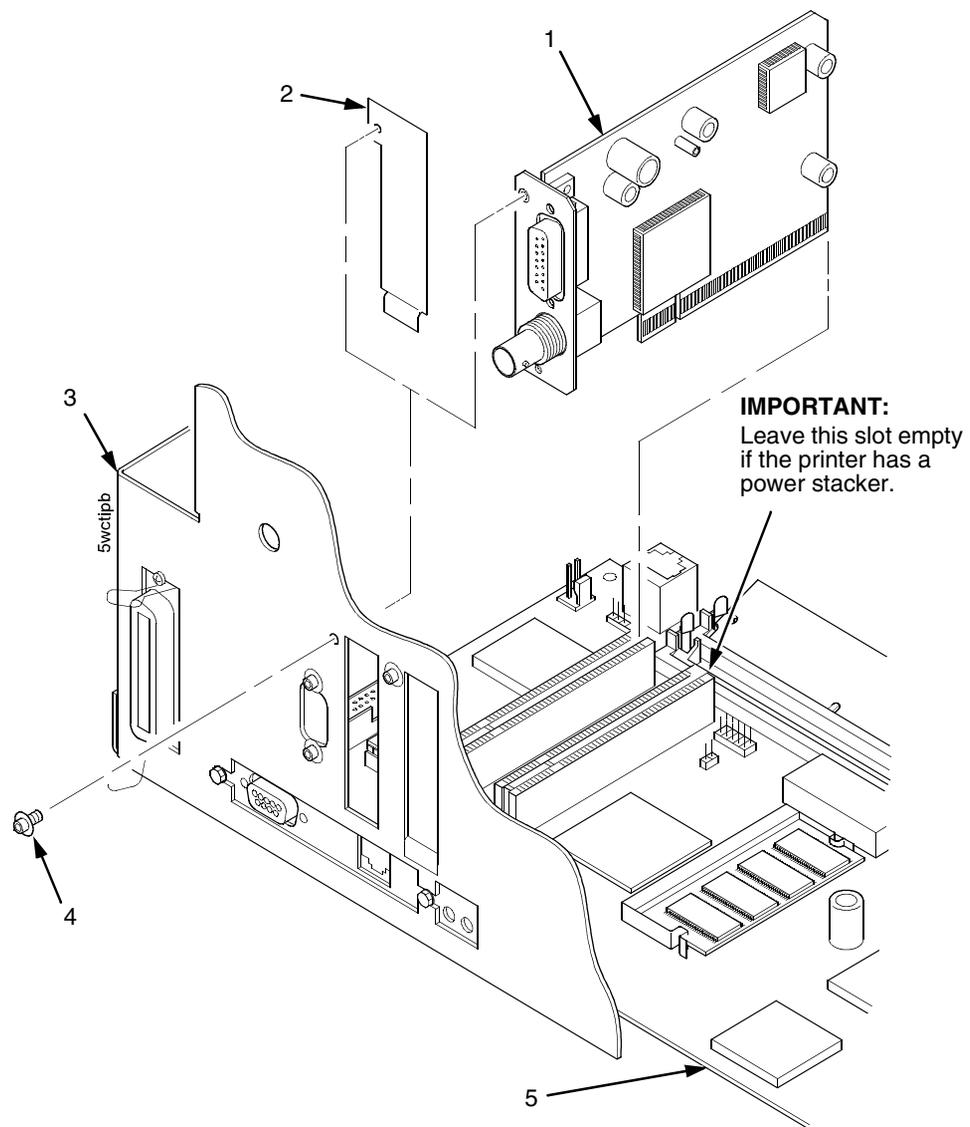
This illustrated parts breakdown shows the IBM coax/twinax expansion board.
